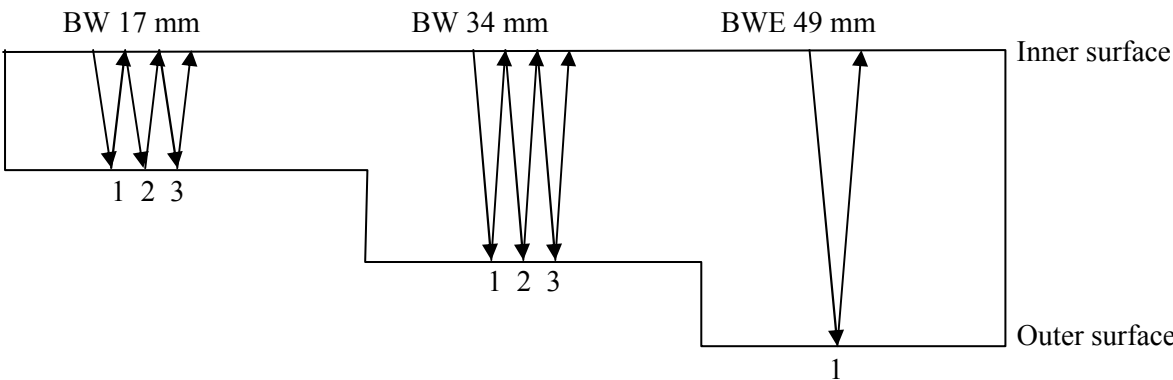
Sketch of the back wall echo positions for test samples T53-1030-125 and T53-1030-220.
